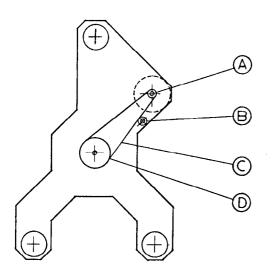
Scan table elevator plate, bottom view. A: motor pulley (12-tooth); B: adjustable idler (24-tooth); C: turntable belt; D: turntable pulley (60-tooth).
